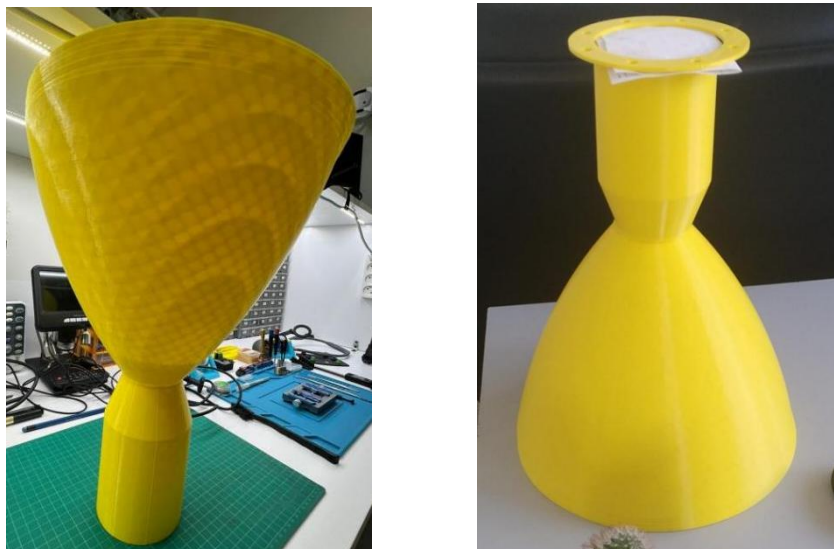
Plastic Model of the Combustion Chamber and Nozzle Fabricated at AECENAR
